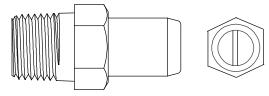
Y99AX-1 (1/8-27 NPT) Pressure Test Fitting Y99AX -2 (1/8-28 BSPT) Pressure Test Fitting
